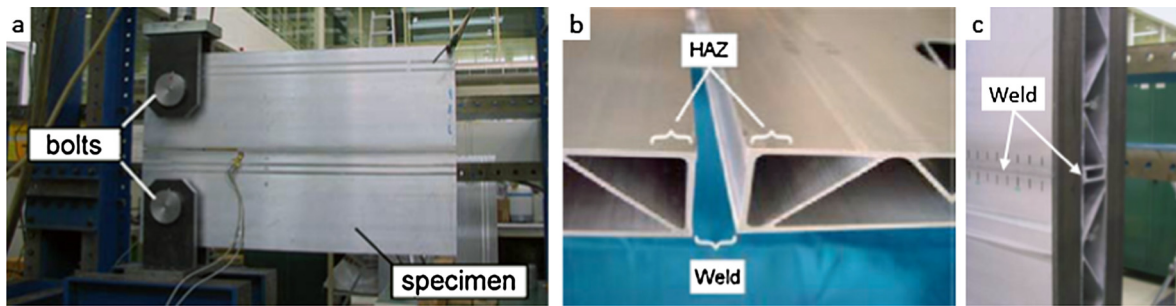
Mode I fracture test of a welded aluminum extrusion: (a) the experimental setup for mode I testing of large panels – welded train extrusion; (b) the cross section of the extrusion showing the two welded sides with weld and HAZ regions; (c) the back side of the panel showing the weld region (reproduced from Zheng et al. [50]).
